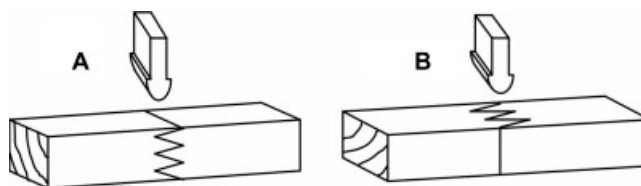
Orientation of finger joints and loading direction in samples (A, horizontal fingers; B, vertical fingers).
